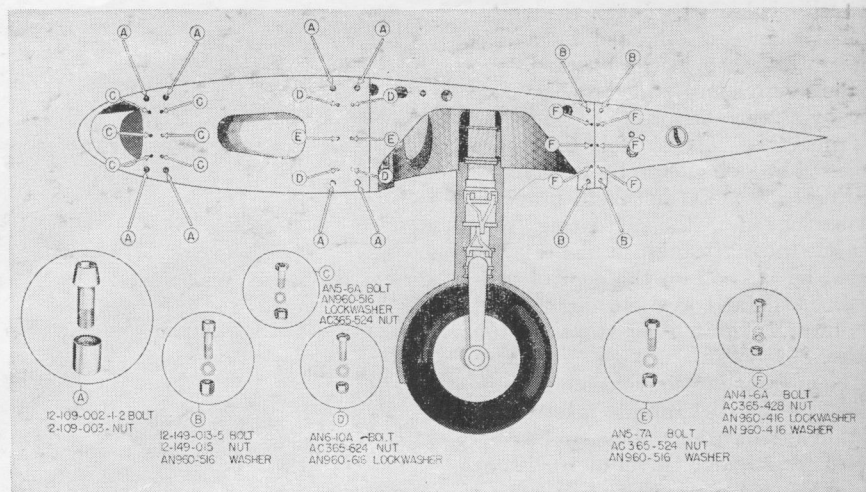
Details of the wing splice bulkhead showing wing bolts and their location.
